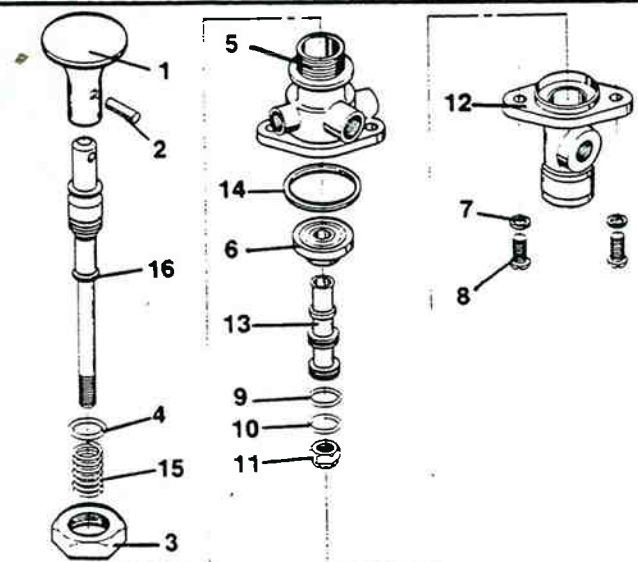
Push-Pull Control Valve Parts Breakdown.
